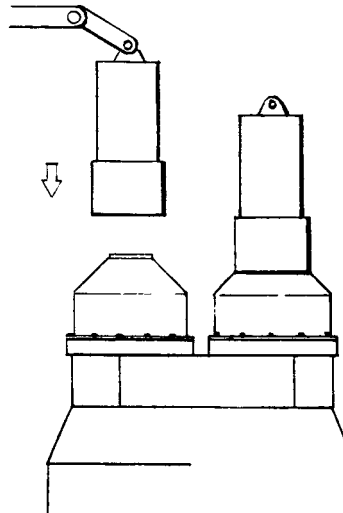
Mating of Loading Mechanism to Lander
